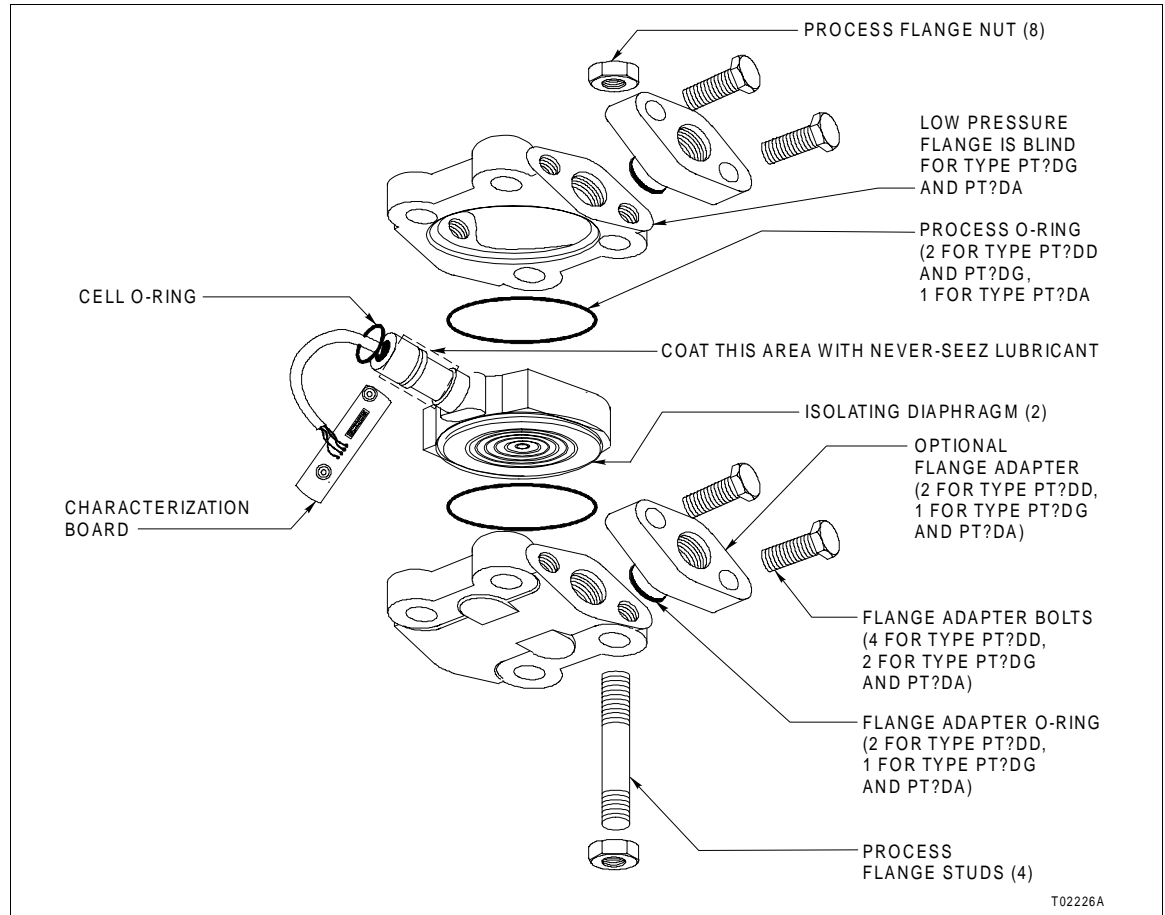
Exploded View of Cell for Type PTSDD Pressure Transmitter
